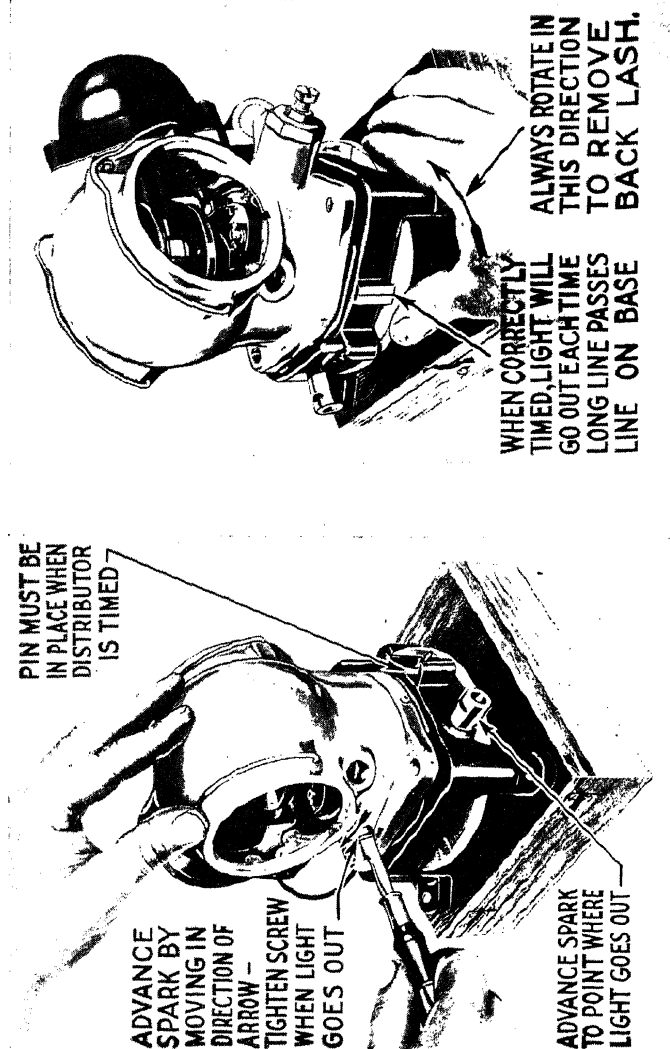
TIMING V.8 DISTRIBUTOR ON SPECIAL TIMING FIXTURE
